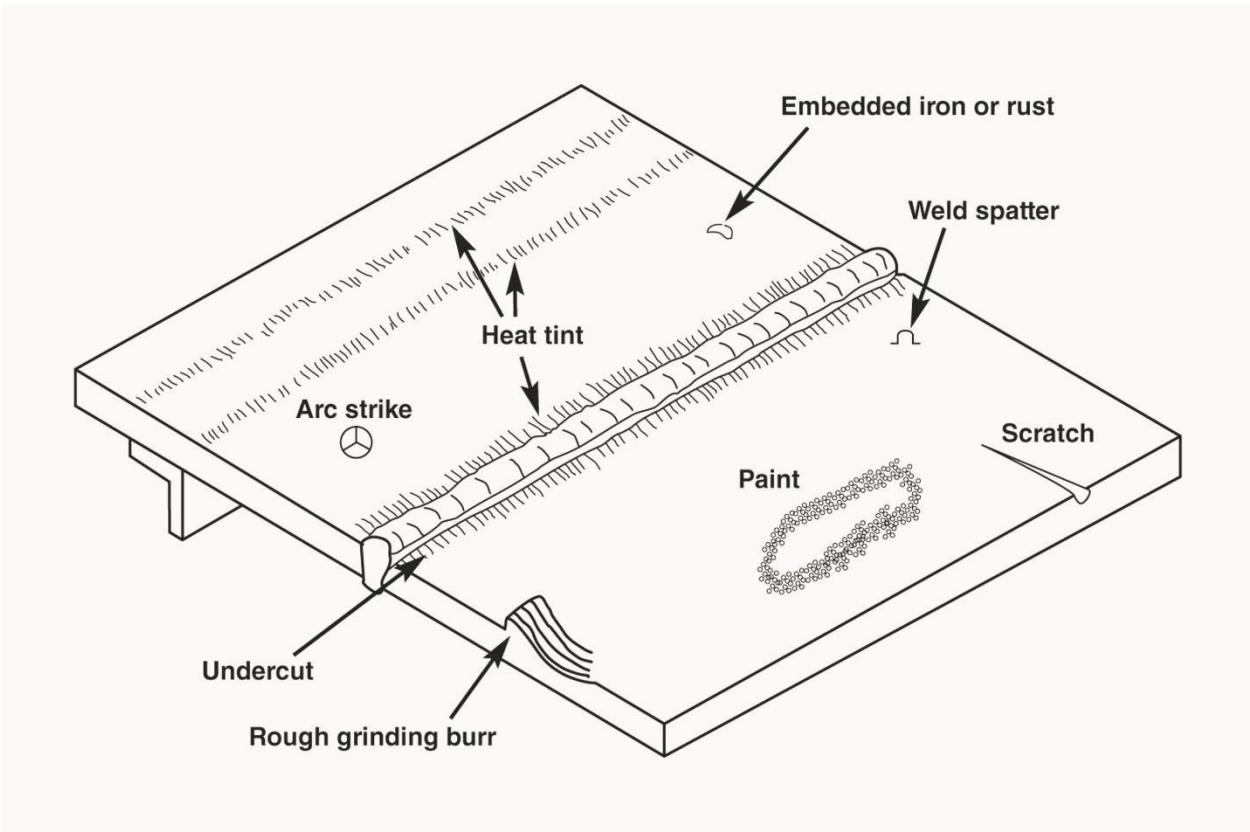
Potential surface defects on stainless steel fabrications
